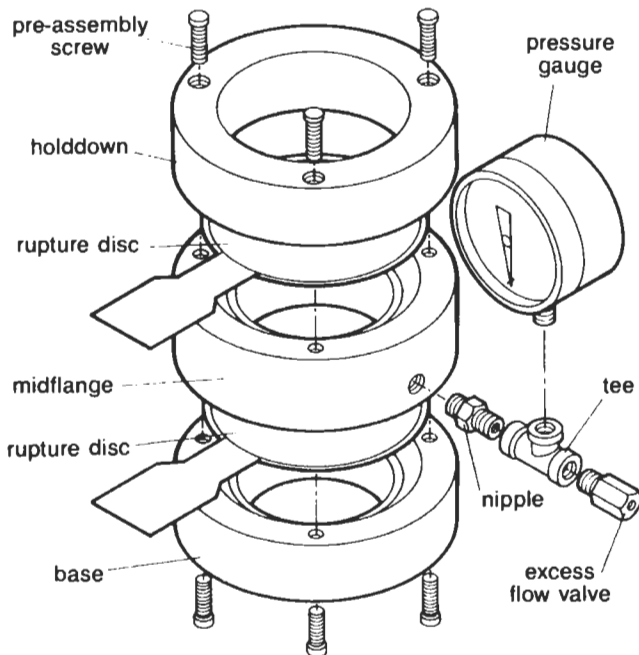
J. Exploded view of double disk assembly. Usually burst pressure is same for each disk. Used for corrosive/toxic conditions to avoid premature loss of process and at remote locations. Note the use of tell-tale between disks. By permission, Fike Metal Products Div., Fike Corporation, Inc.
